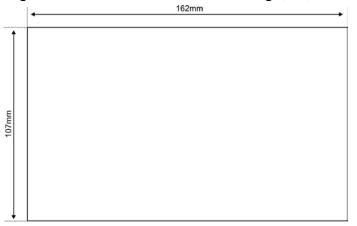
The DIN Rail Mounting (D2) Dimensions
